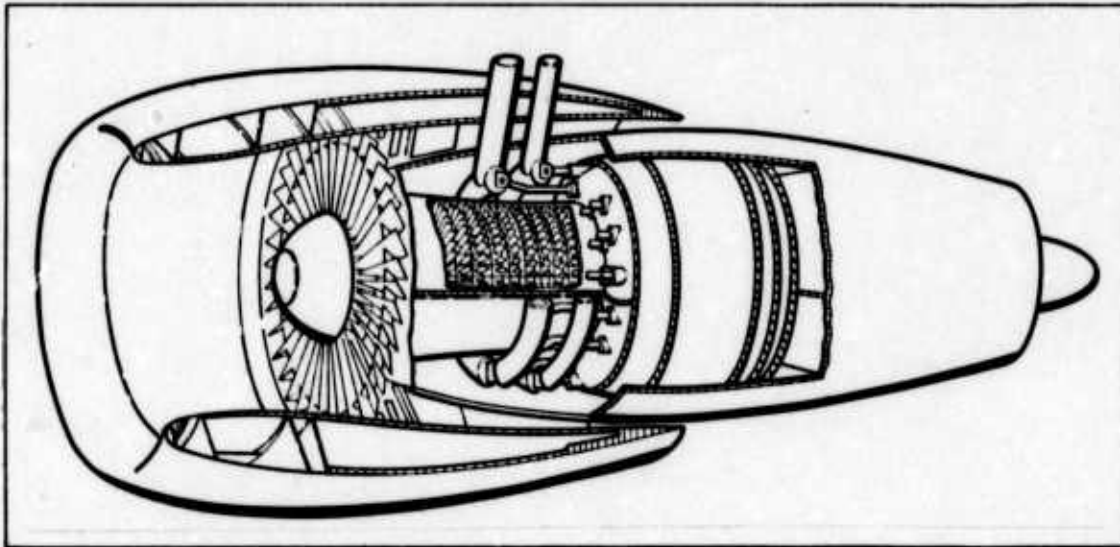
Nuclear Turbopan Engine Layout Showing Heat Exchanger Manifolds (Ref. 111, p. 69)
